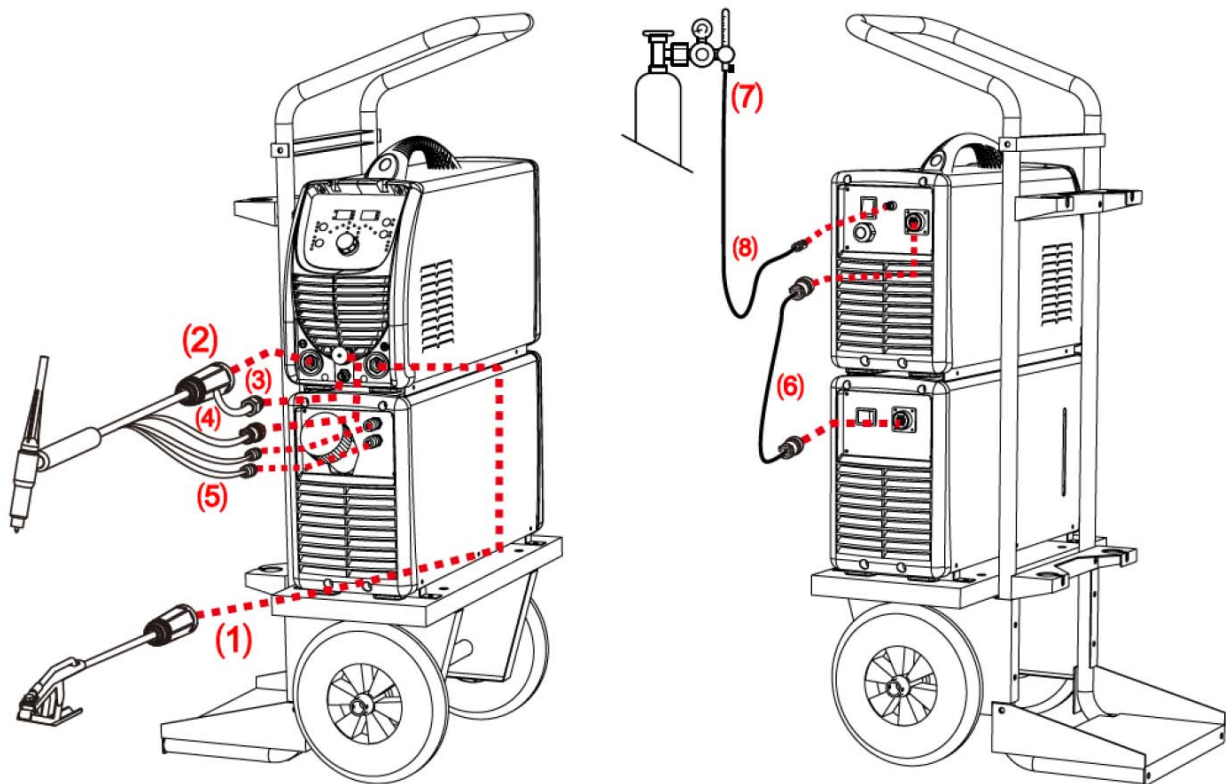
Set up installation for TIG Welding CRAFT-TIG 253 DC PULSE
